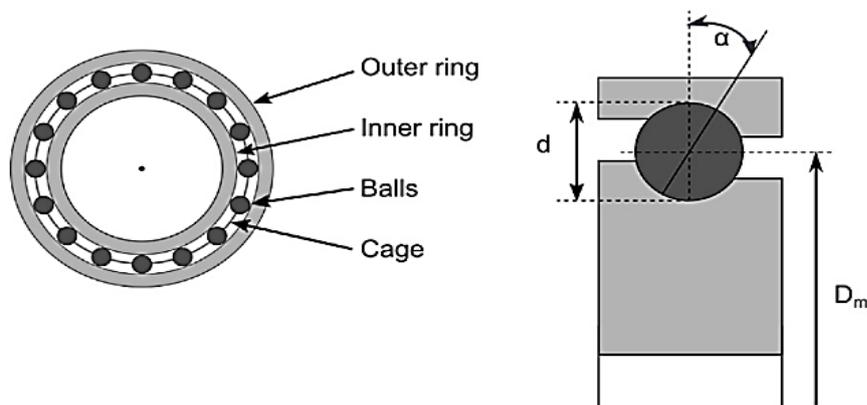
Views of the Front and Side of a Ball Bearing's Structure.
